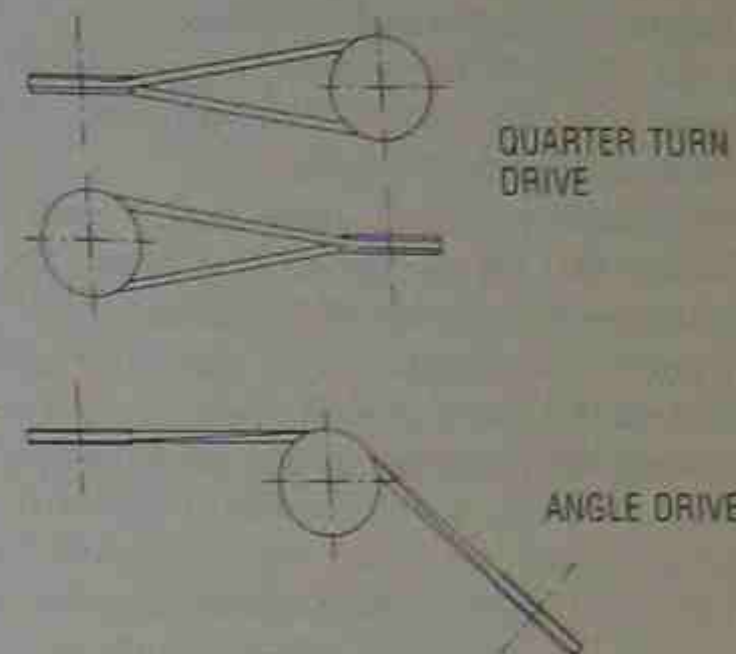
V-belts can be used for quarter turn and angle drives.
